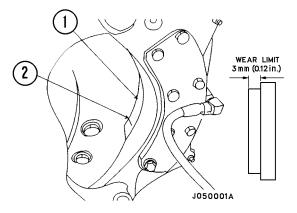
FRONT PAD WEAR 1. Brake Pad 2. Wear Limit Line
